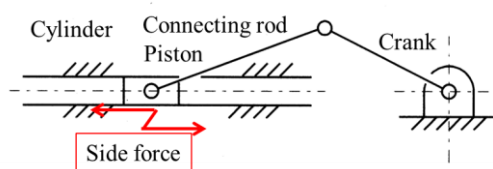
Schematic of slider-crank mechanism. The crank and the connecting rod are each indicated by a representative straight line segment. White circles indicate revolute pairs. A side force acts on the piston as it moves in the cylinder, thereby causing contact with the internal wall.
